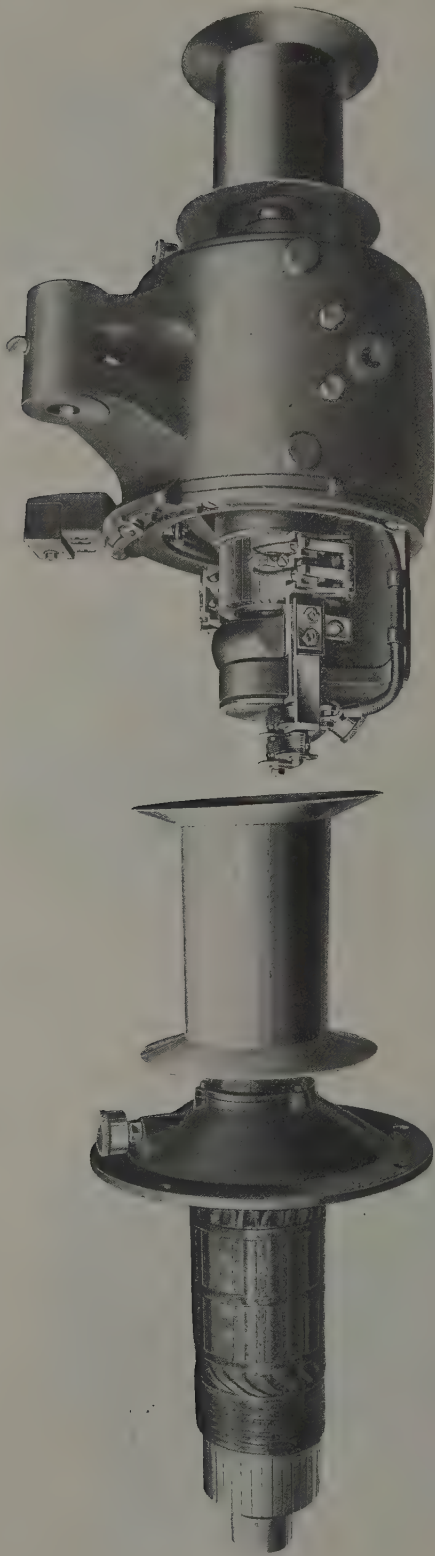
T-35 Armature Commutator, Backhead Bearing and Pulley.
